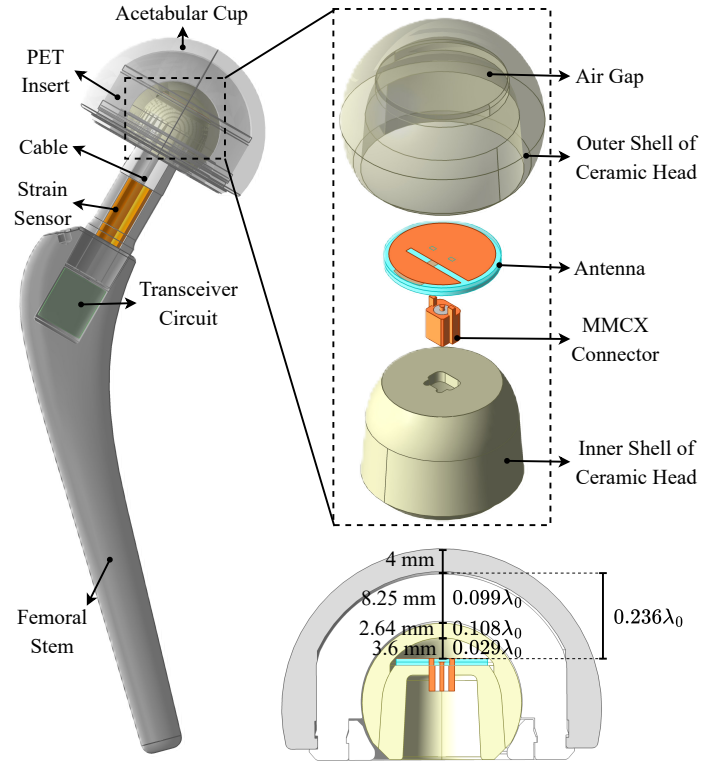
The hip implant model with exploded view of inside the ceramic head and cross section of the ceramic head with dimensions.
